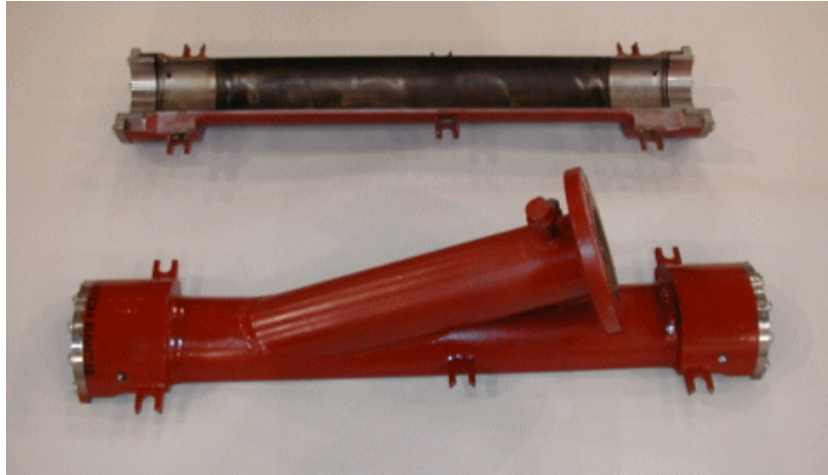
Cast Iron Entry Fitting (4-inch Prototype)
